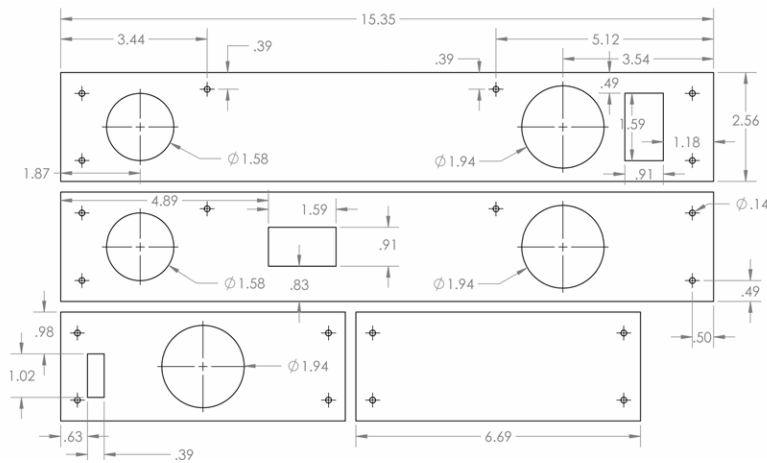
Side sheet of gondola cut from one large sheet, dimensions in inches
